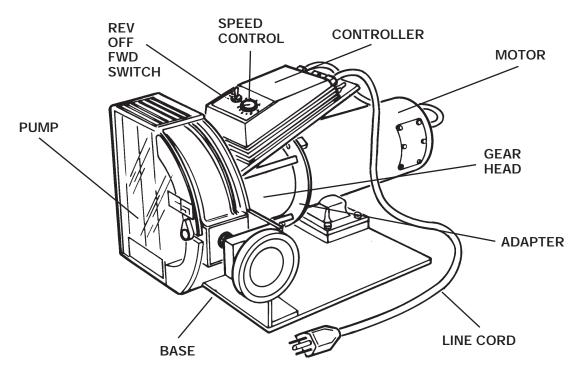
TYPICAL RAPID-LOAD PUMP AND DRIVE
